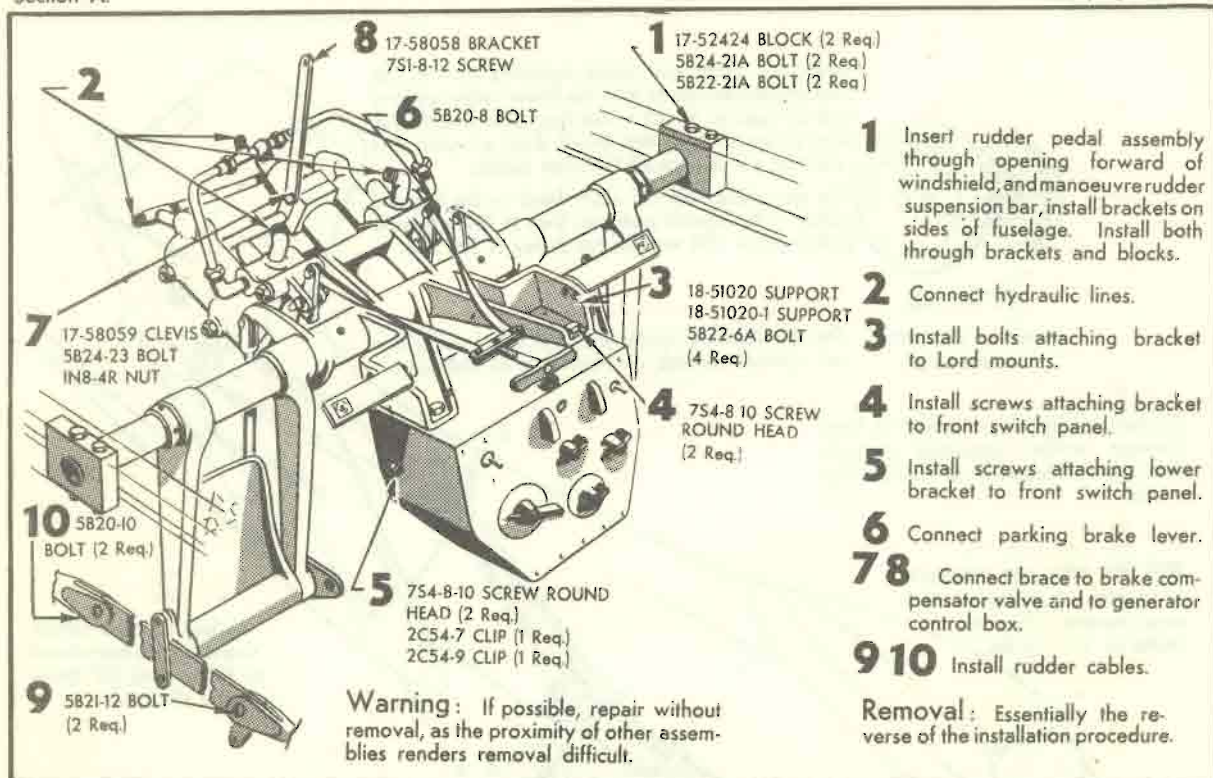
INSTALLING RUDDER PEDAL ASSEMBLY
